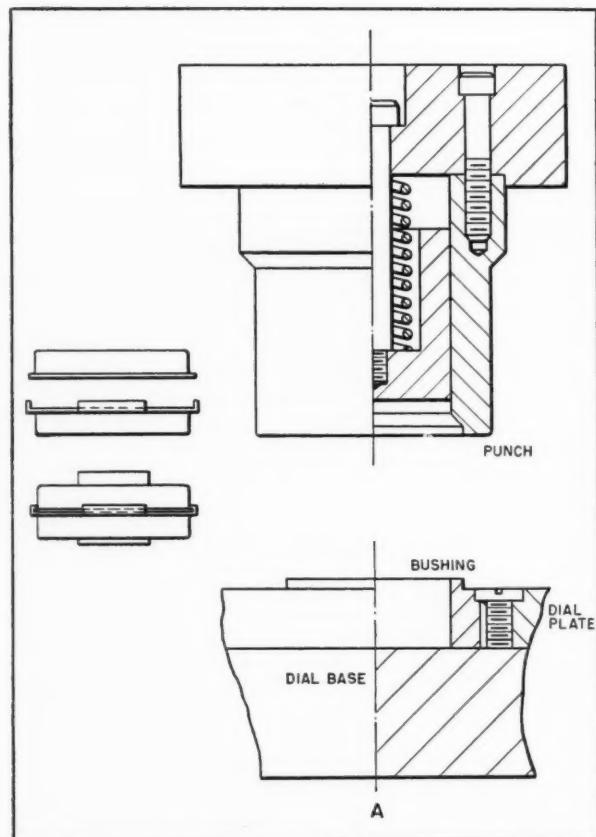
Details of punch and die, showing arrangement of work-holding bushing on dial base developed by Federal Press Co.
